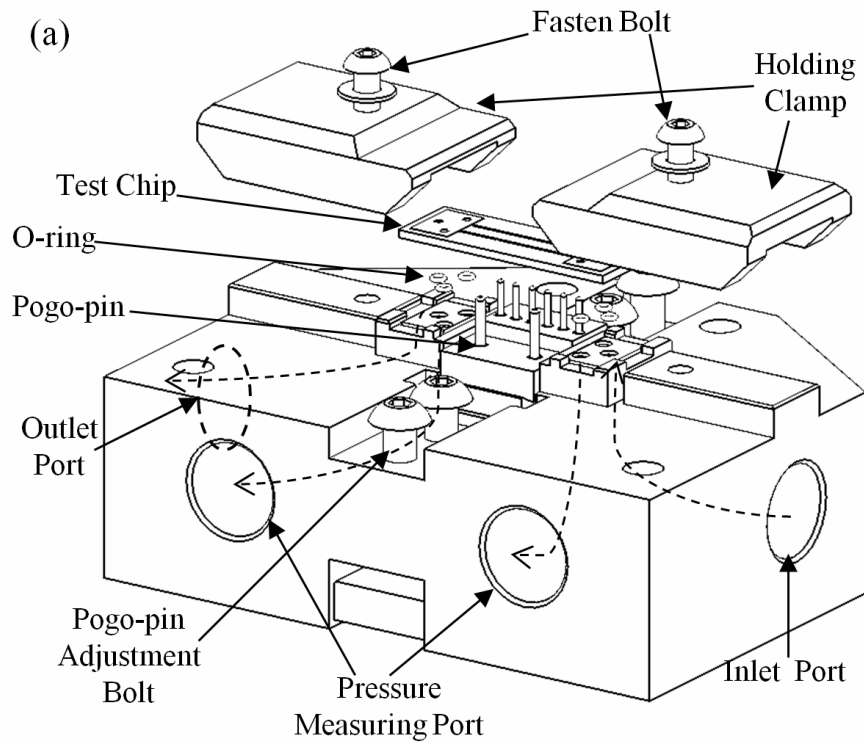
An exploded 3D model of testing package module, which provide hydraulic and electrical connections.
